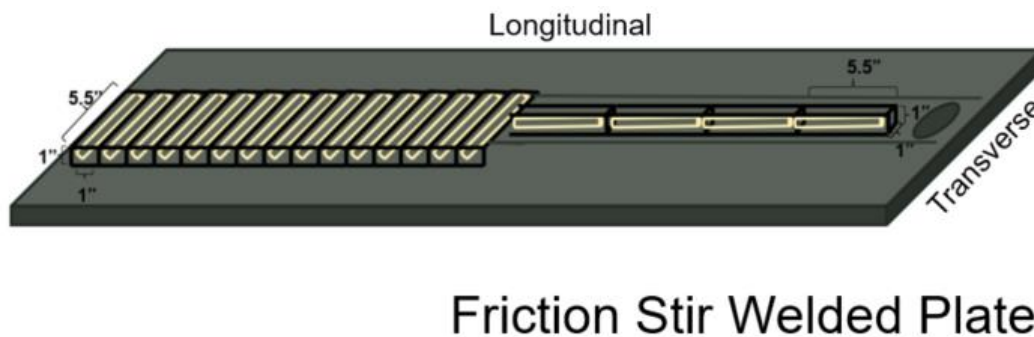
Friction Stir Welded Specimen Extraction
